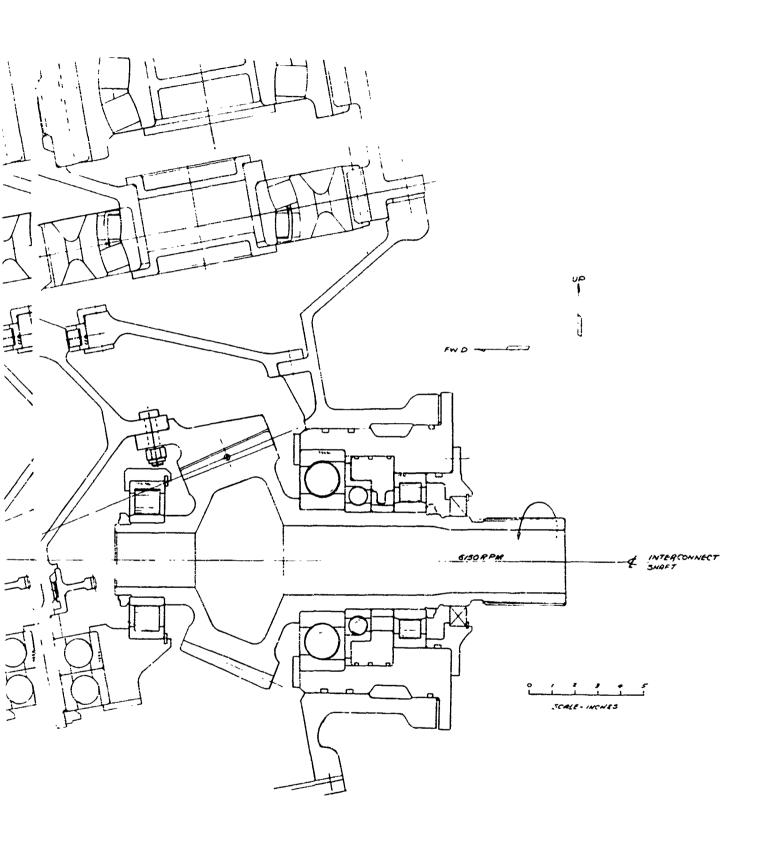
FORWARD ROTOR TRANSMISSION - CONVENTIONAL STRESS LEVEL GEARS AND BEARINGS.
